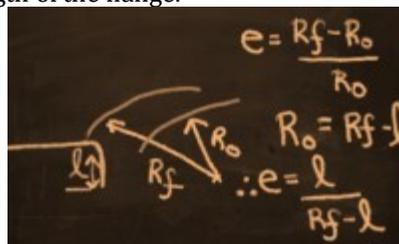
plan view radius of the initial trim, final plan view radius and intended length of the flange
